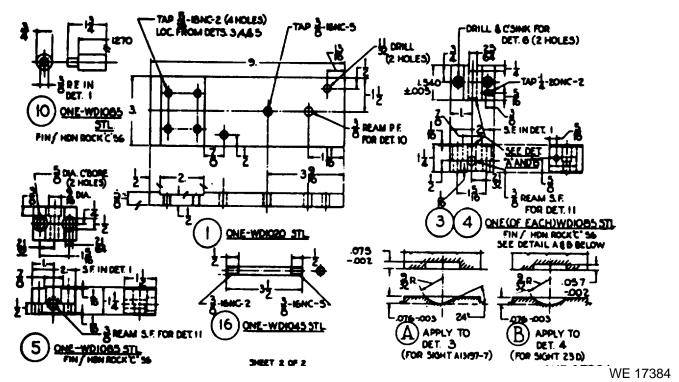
Improvised fixture for riveting front sight. (2 of 2)
